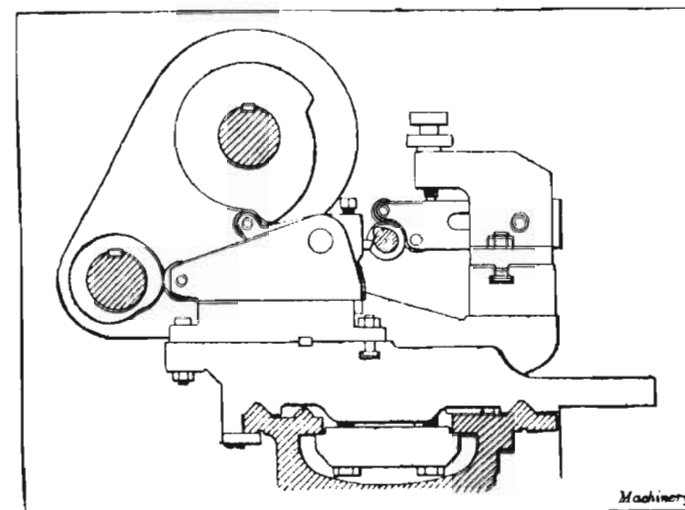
Cross-section of Lathe, Showing Cams that Maintain Constant Cutting Angle of Tool
